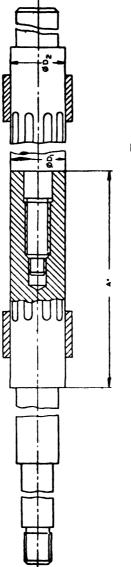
FLUTED ROLLER FOR JUTE SILVER SPINNING FRAME
